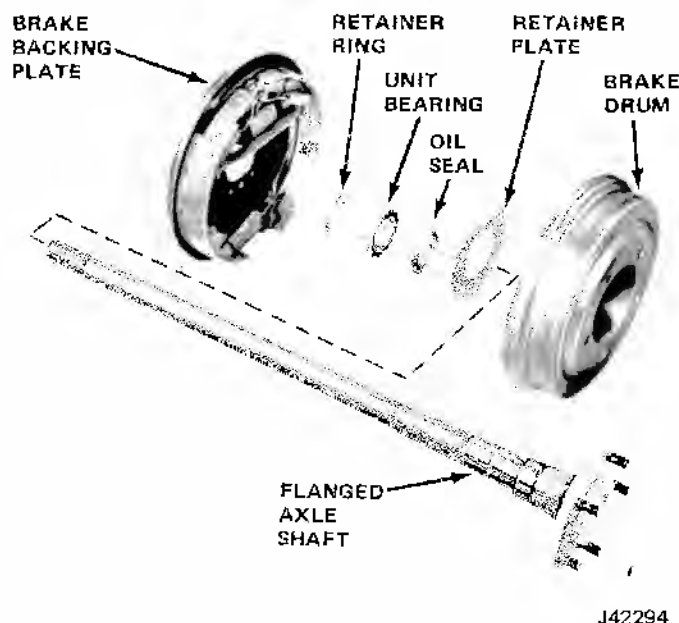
Rear Wheel Attaching Parts - Flanged Axle
